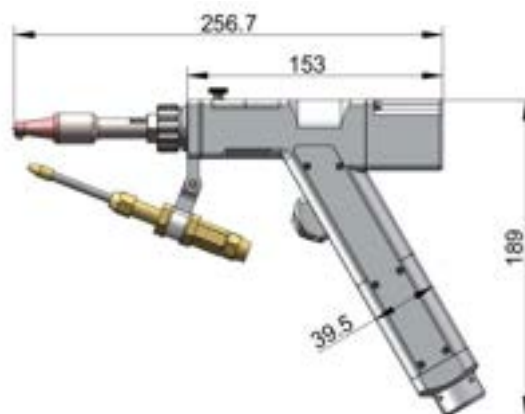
Overall dimensions of the Welding gun
